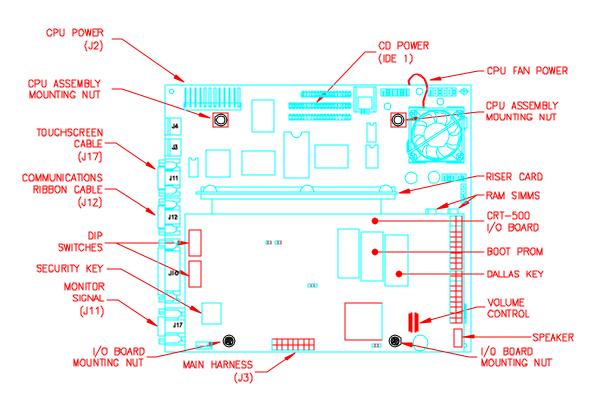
DEAMERTEK MOTHERBOARD AND I/O ASSEMBLY
